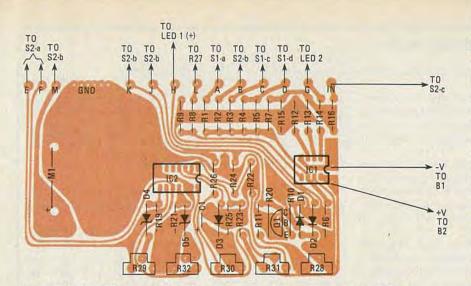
MOUNT TRIMMER POTS R28-R32 so they can be adjusted from outside of board.
